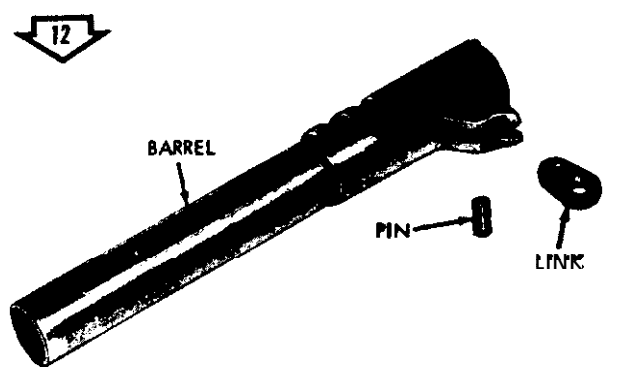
Disassembly/assembly of barrel and slide group (2 of 4).
